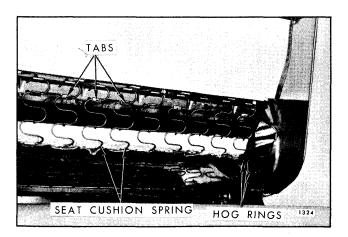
Seat Cushion-to-Back Spring Attachment
